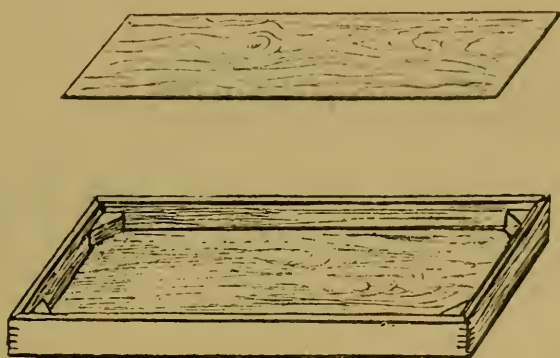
FALSE BOTTOM IN BASE FOR COIL.
